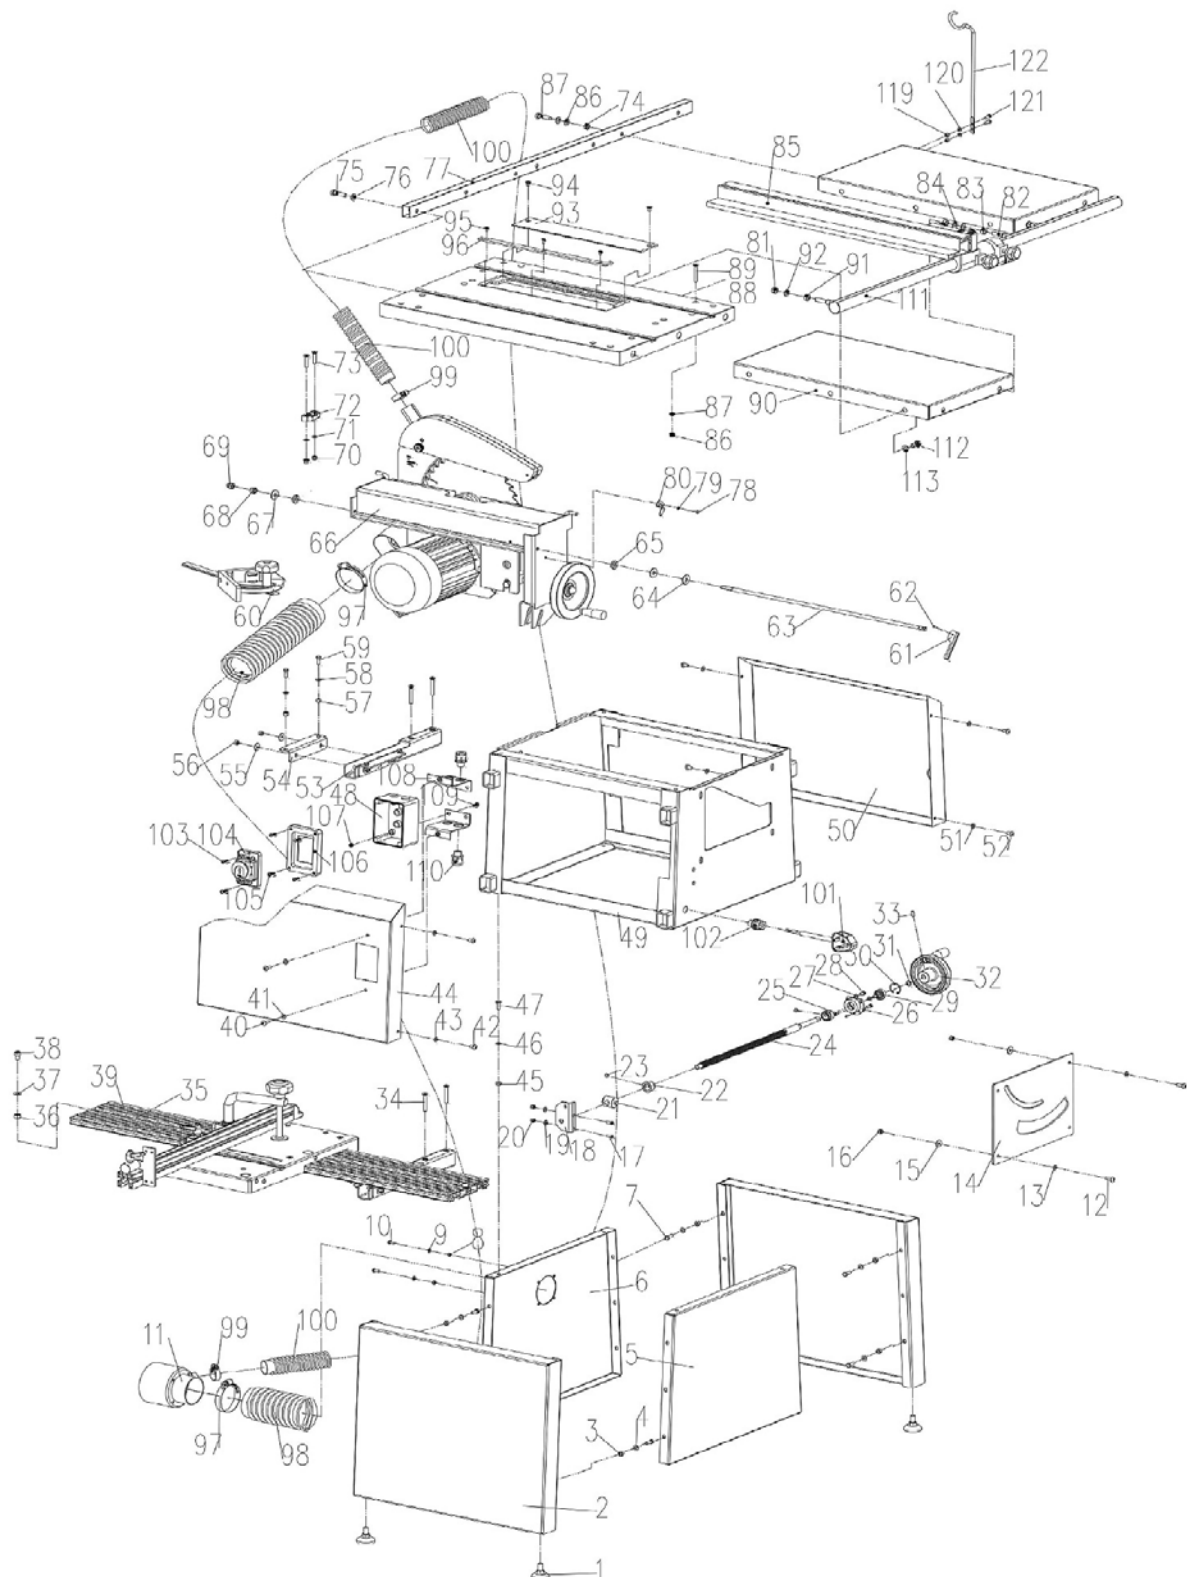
Spare parts Drawing 1 for TKS 254 E
